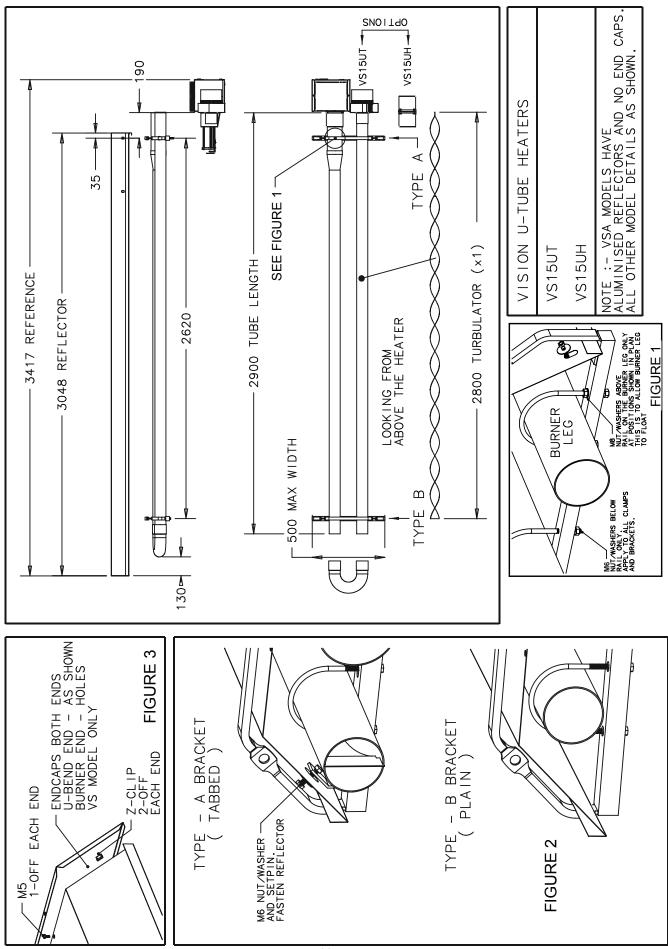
Vision Heater Assembly: Models VS/VSA U tube 15kW.
